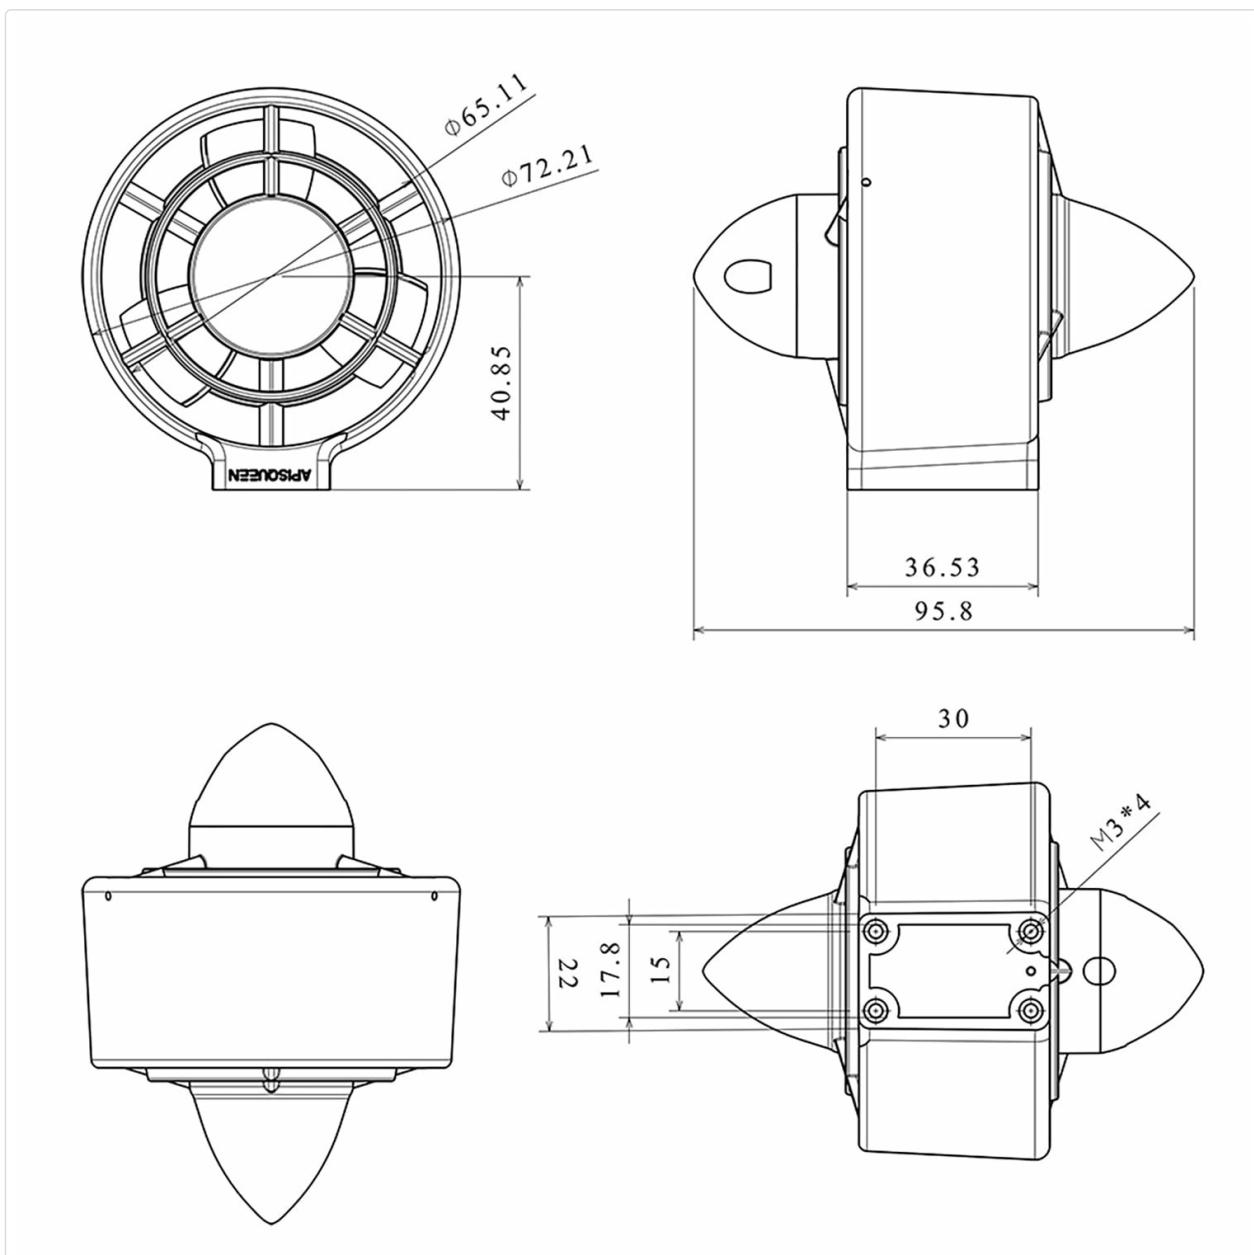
Detailed technical drawing illustrating the dimensions of the U2 Underwater Thruster.
